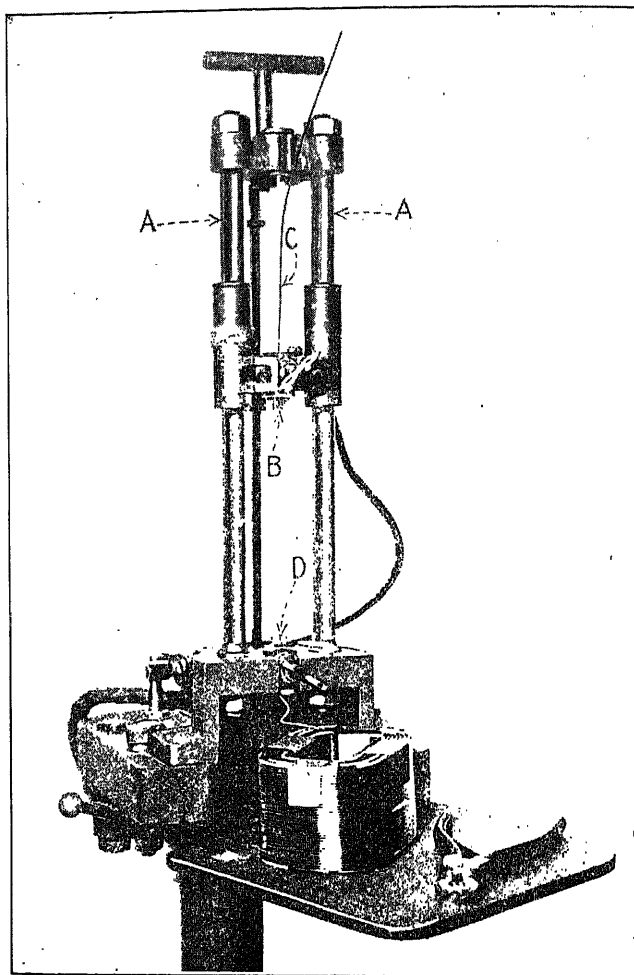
Electro-Percussive Welding Machine.
